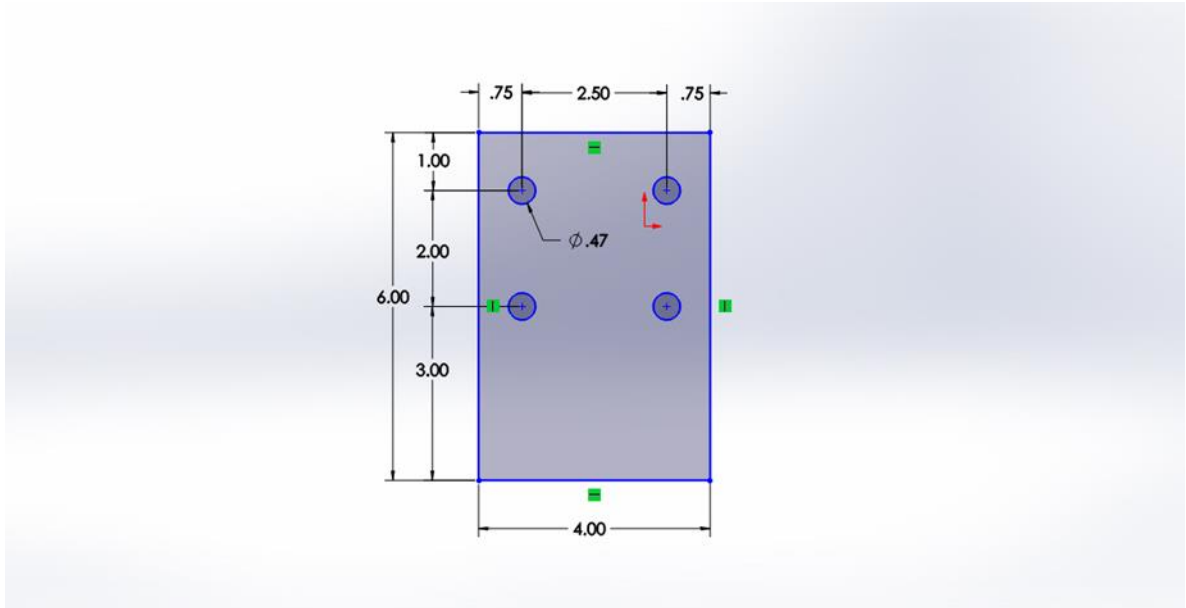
Schematic of Welded part (all dimensions are in inch)
